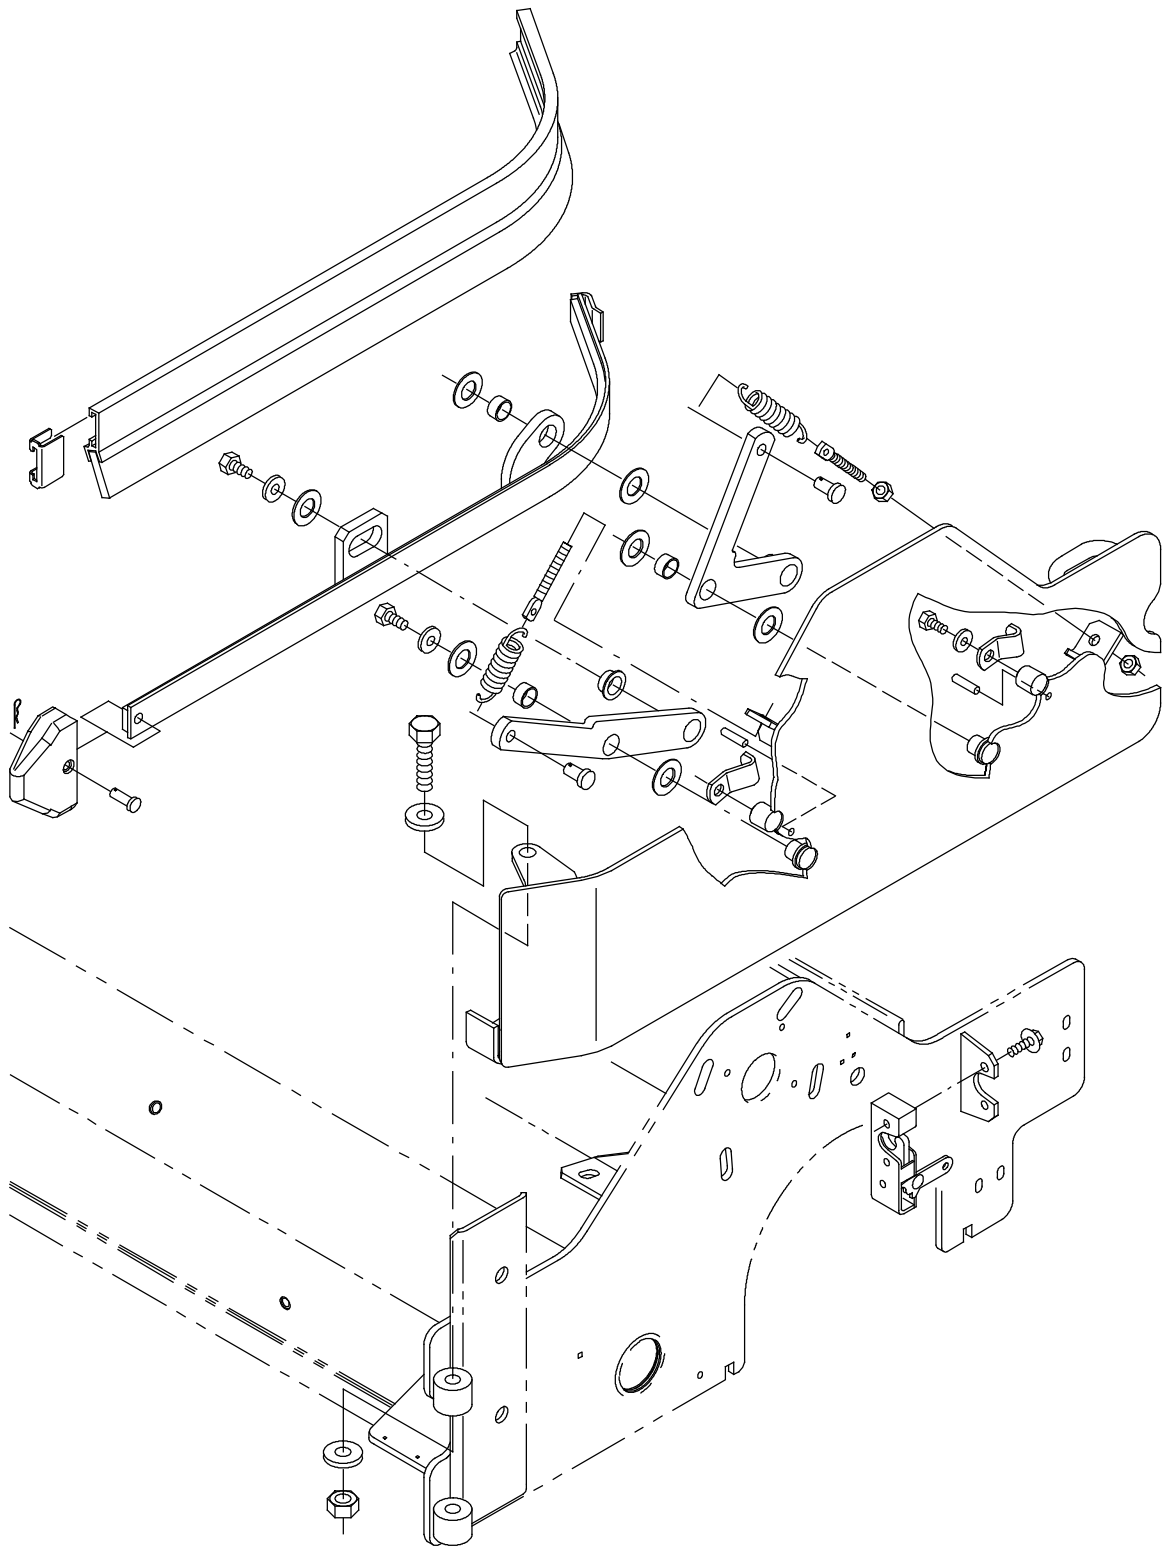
MaxPro 1000 Cylindrical Scrub Head Solution Valve Group
